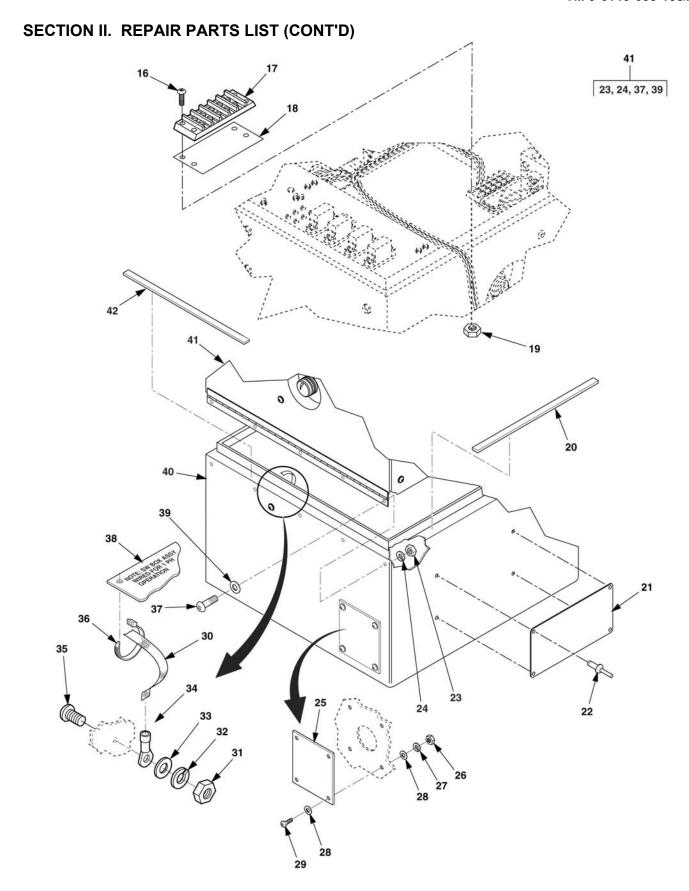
Switch/Box Assembly, 97403 13230E6950 (Sheet 2 of 3)
